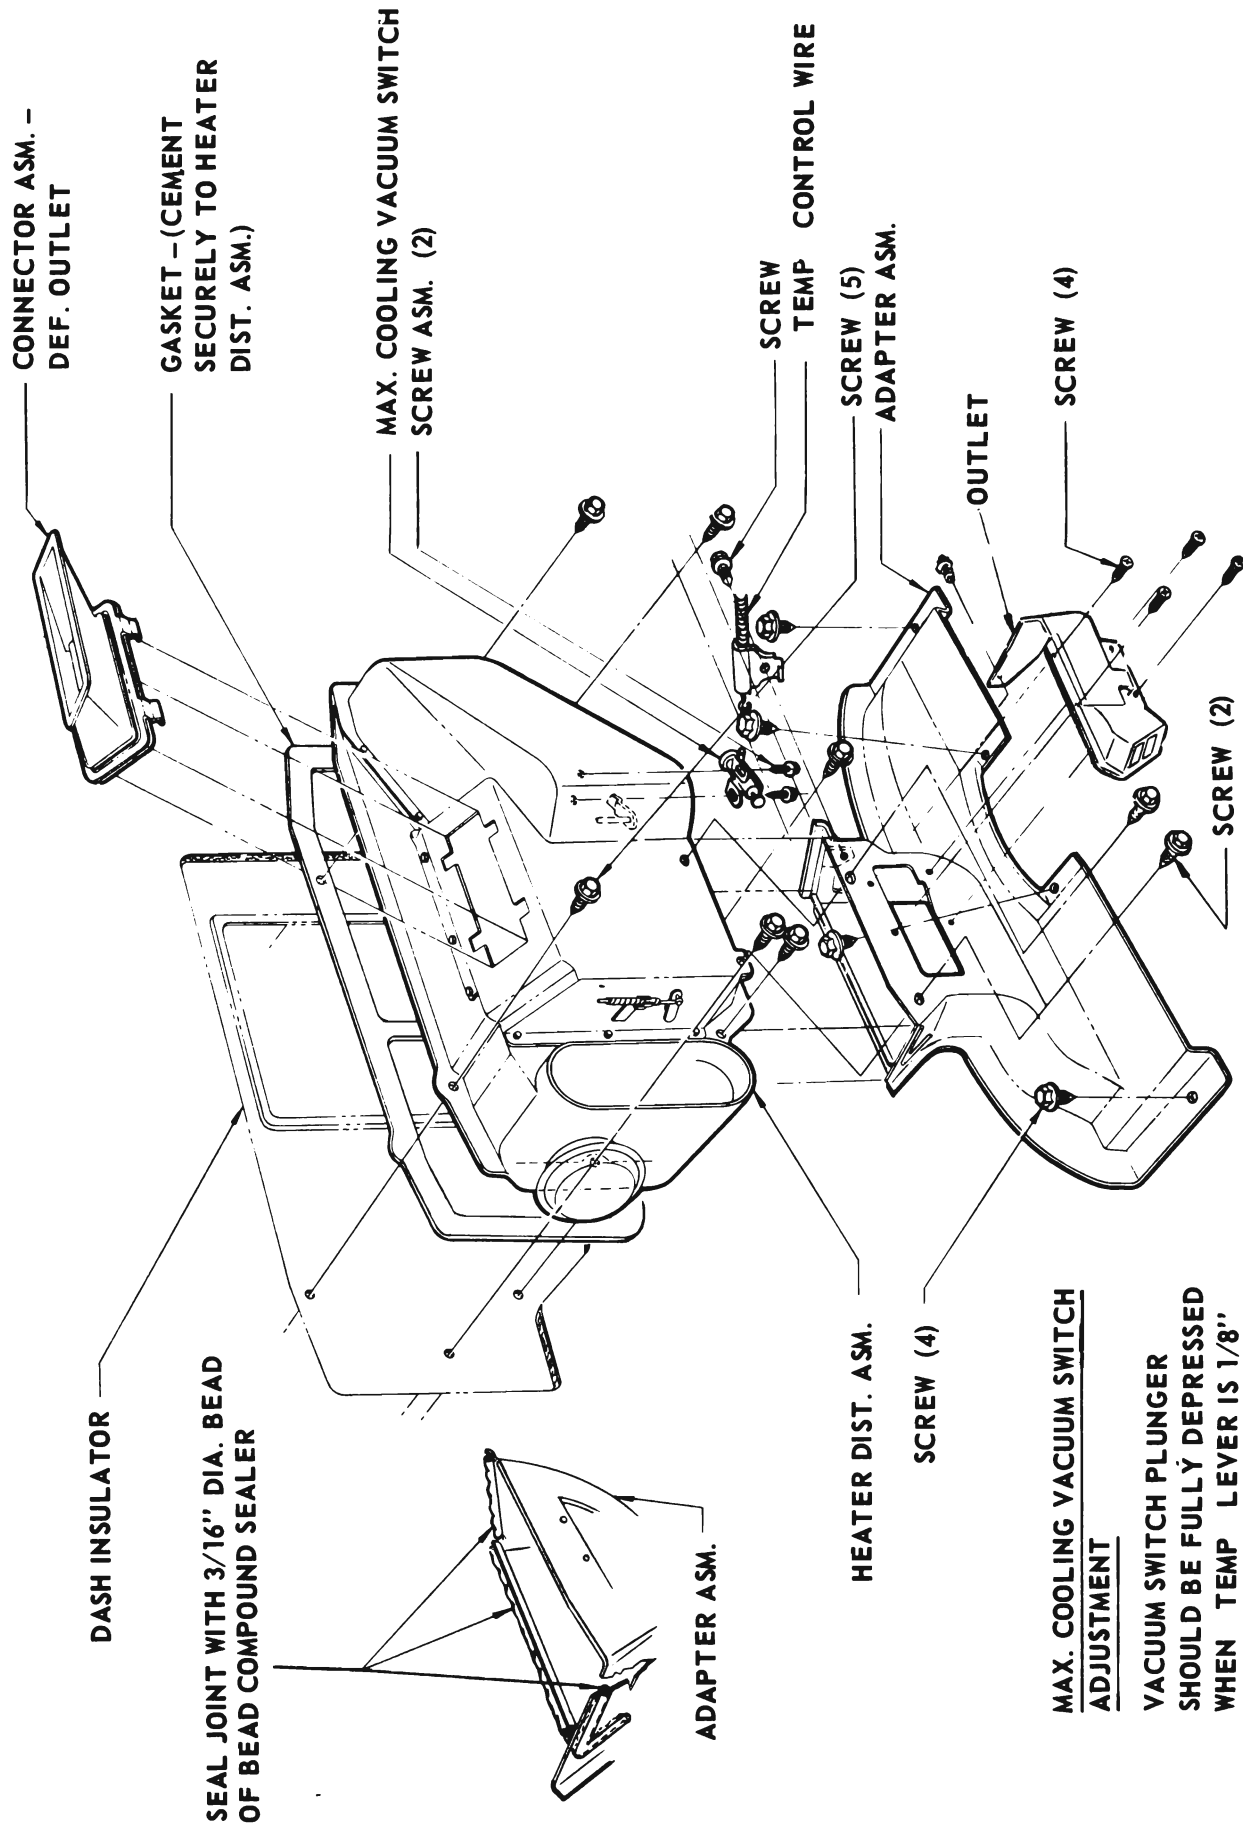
Heater Distributor Assembly, Adapter Assembly and Maximum Cooling Vacuum Switch Installation - 4400, 4600 and 4800 Series
